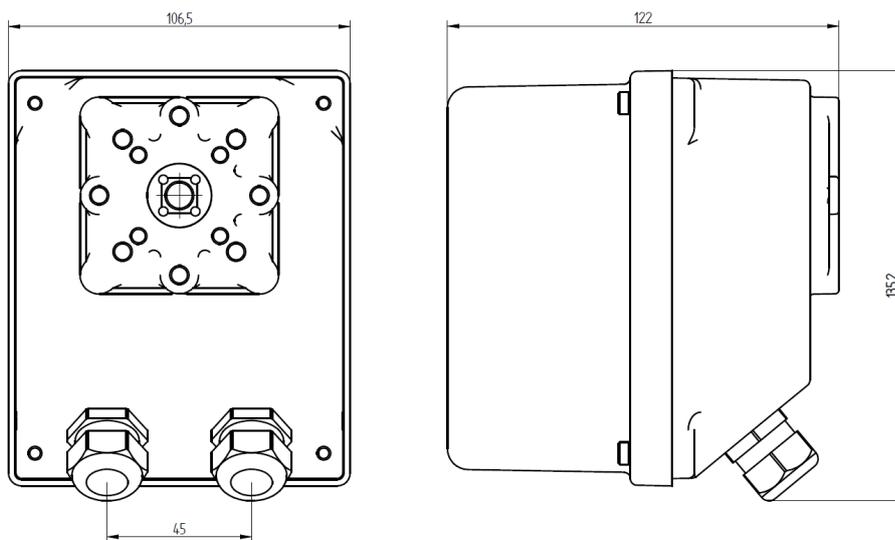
Dimensioned drawing actuator with cable entry via cable glands
